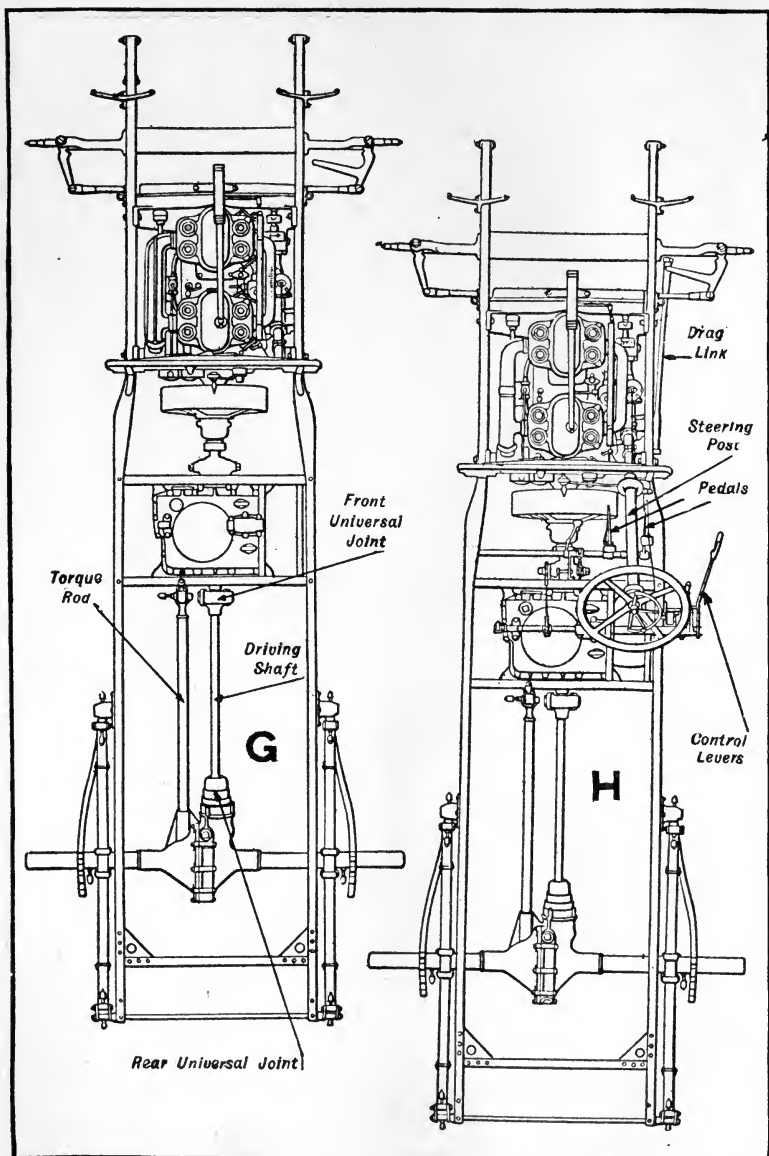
After Driving Shaft, Steering Wheel, and Control Levers are Added the Chassis begins to Assume a Finished Appearance.
